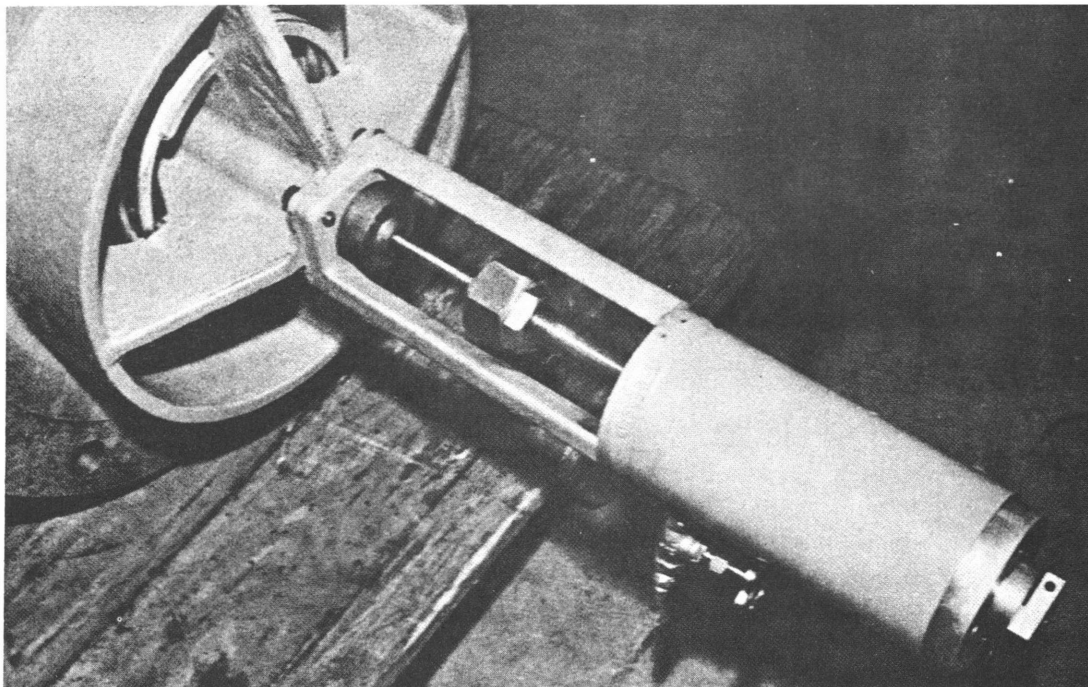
View of 16-in. prototype valve with pneumatic cylinder attached.
